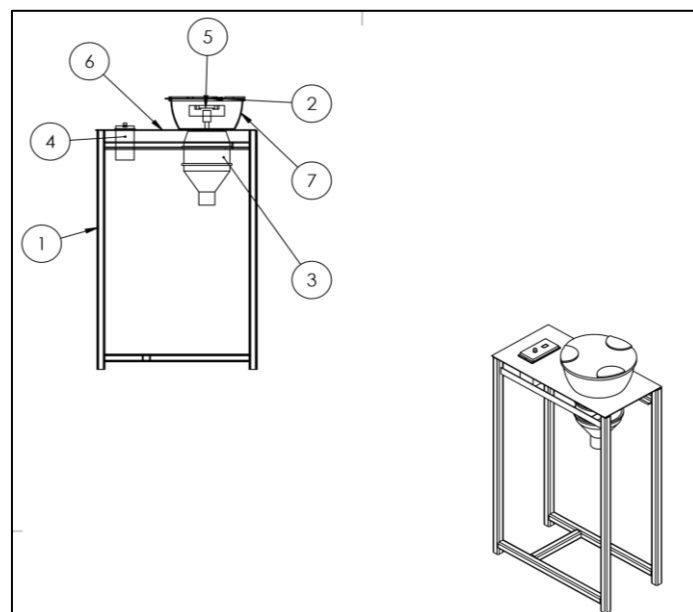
Assembly drawing (1.body, 2.cover, 3.motor, 4.motor control unit, 5. Sample holder, 6.desk, 7.tank)
